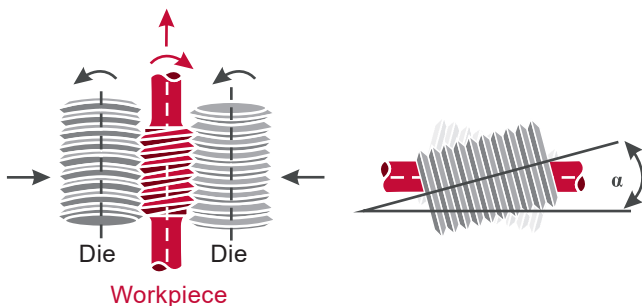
Thrufeed Thread Rolling with Groove Dies
